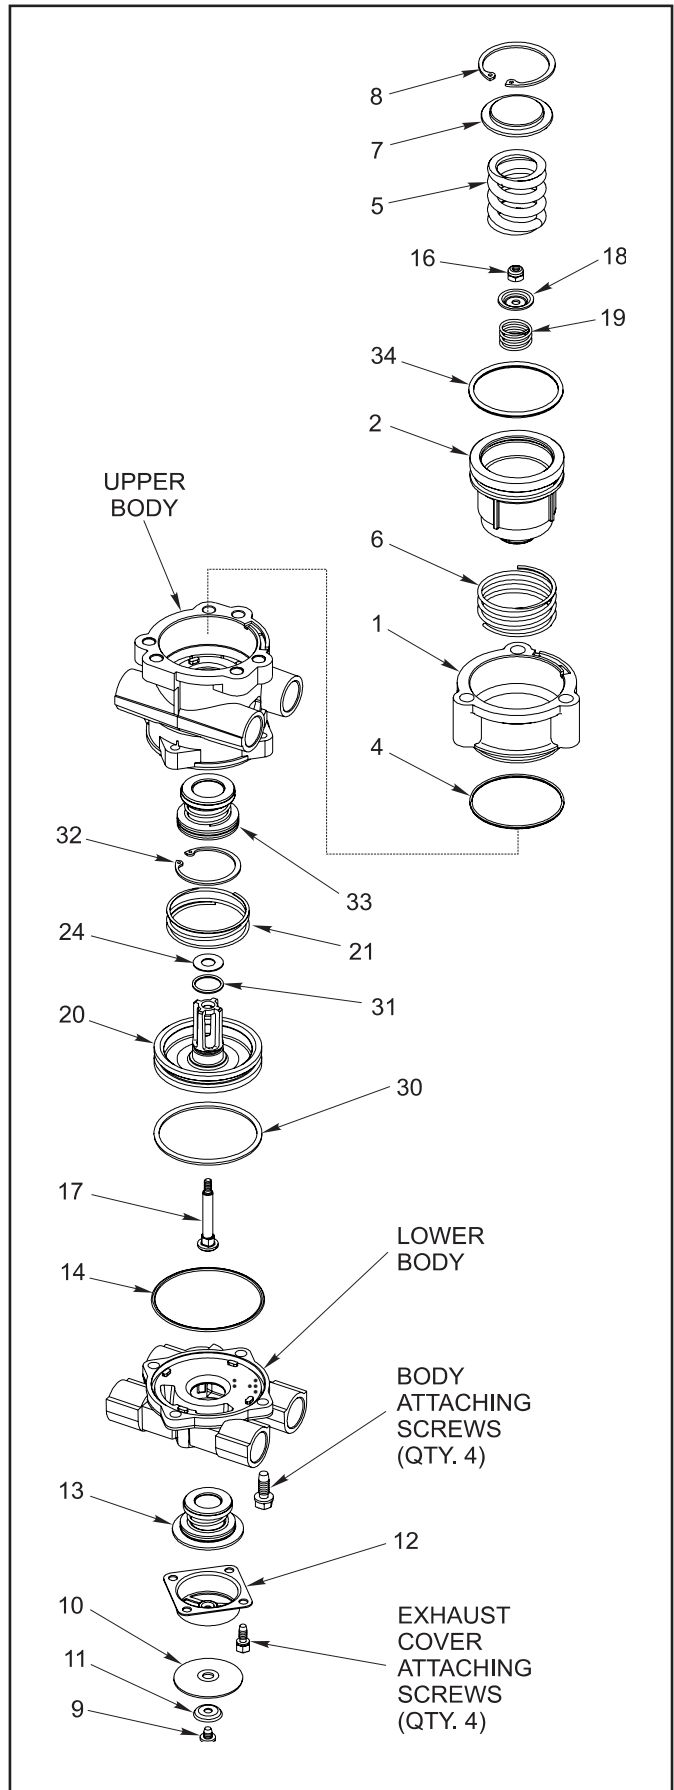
E-10P™ DUAL BRAKE VALVE - EXPLODED VIEW
